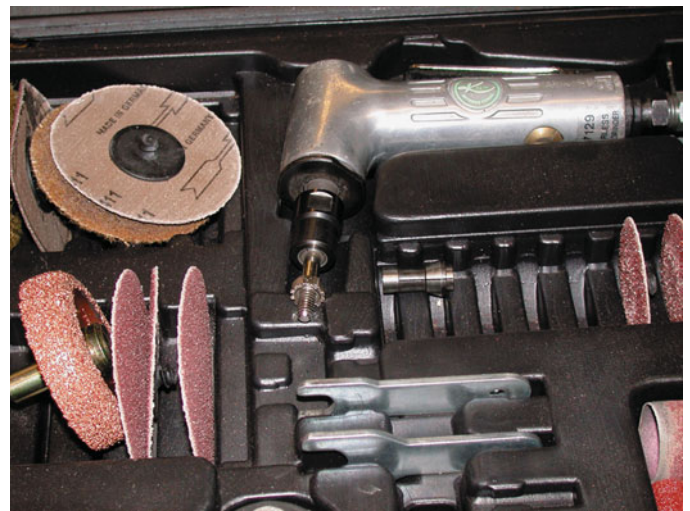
This typical die grinder surface preparation kit includes the air-operated die grinder and a variety of sanding disks for smoothing surfaces or removing rust.
